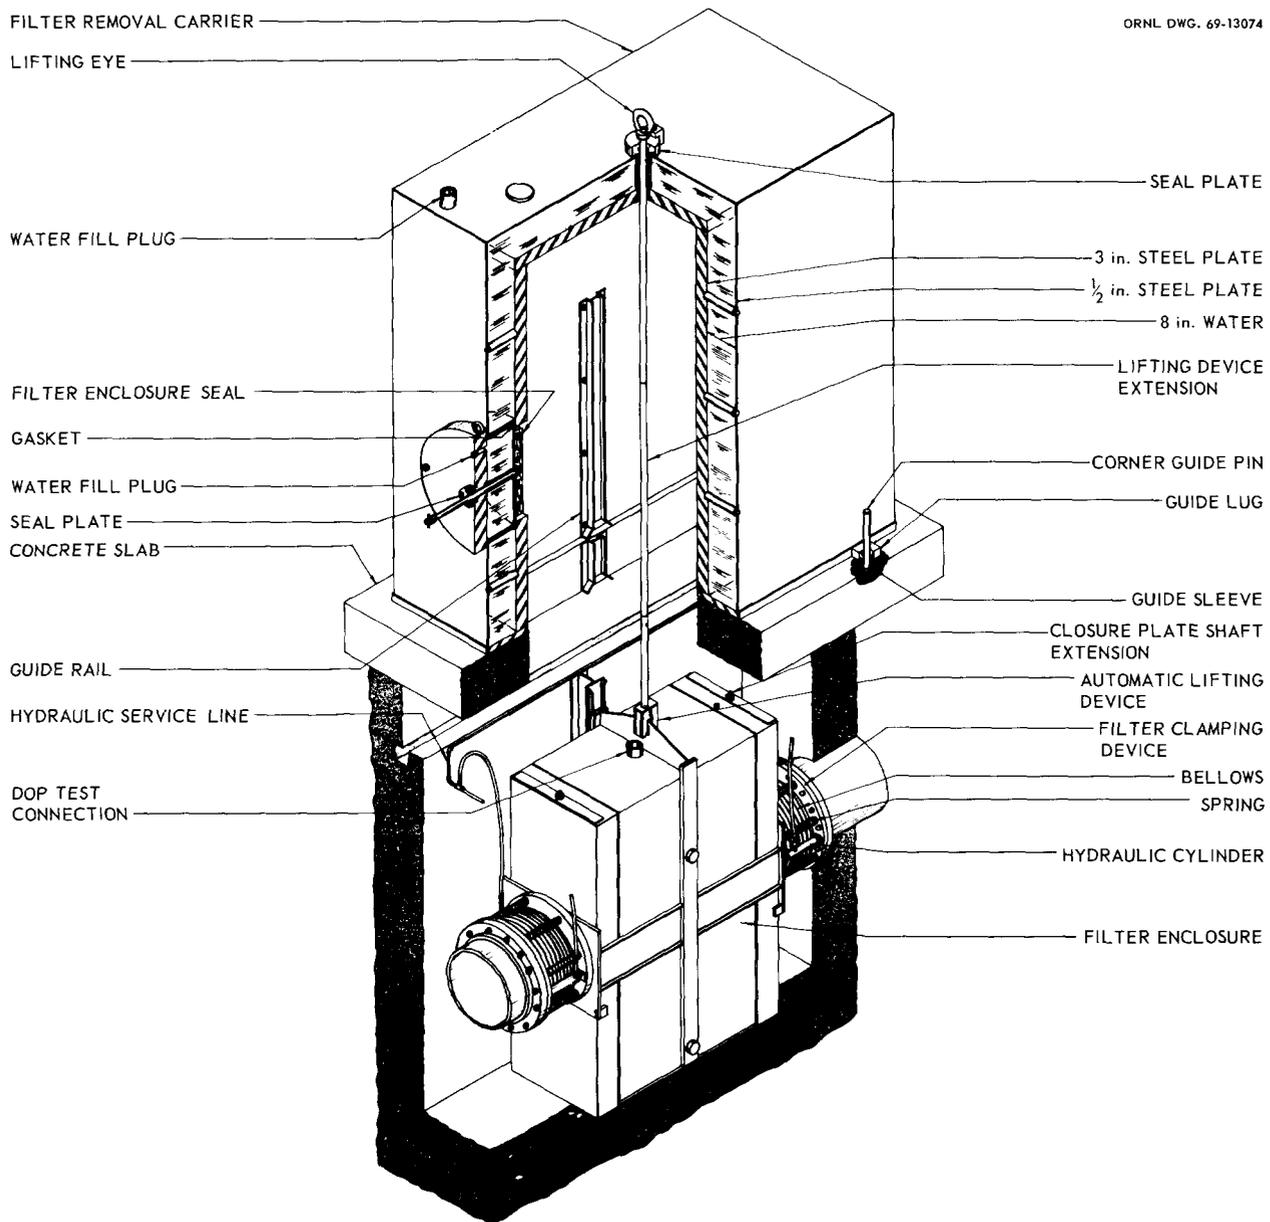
TURF filter system. Carrier positioned over pit preparatory to removal of filter housing. Courtesy Oak Ridge National Laboratory.
